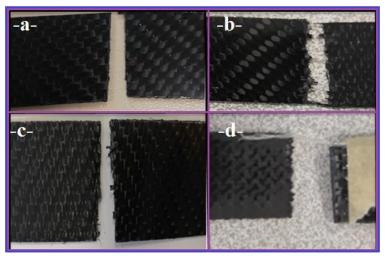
Fracture surfaces of woven composite plates a) Breaking surface in 245 twill weave type, b) Fiber separation on 245 twill weave type, c) Breaking surface on 200 plain weave type, d) Fiber separation in 200 plain weave type.
